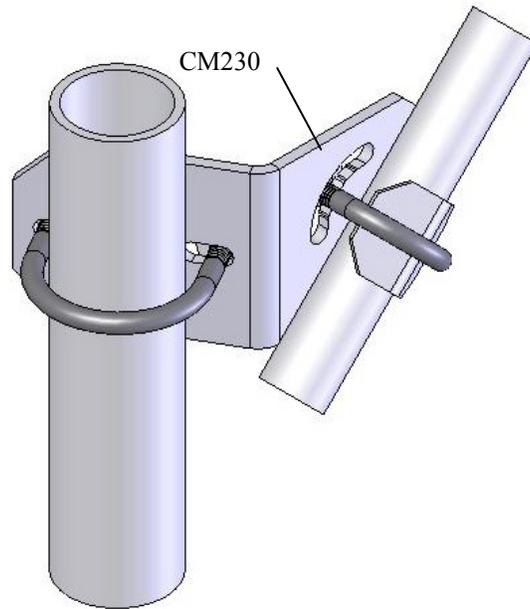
CM230 Adjustable Angle Mounting Kit
